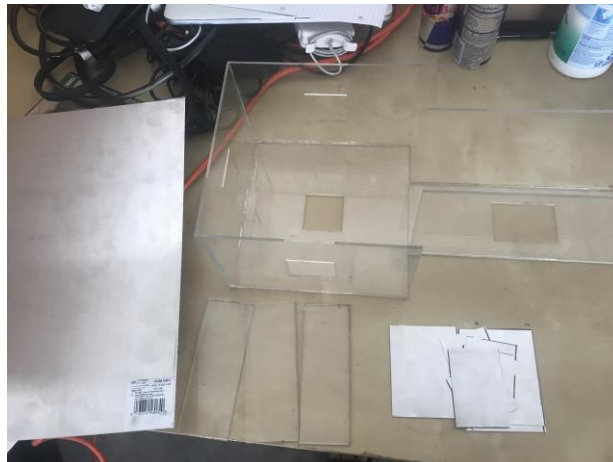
Final Prototype Assembly: Picture of parts of the final prototype as well as the process of assembling the acrylic pieces.
